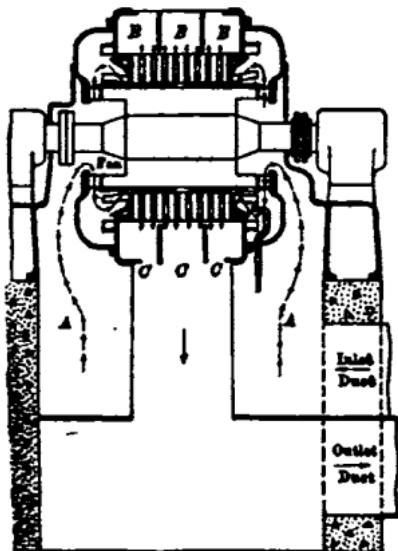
Radial system of ventilating a horizontal-shaft high-speed generator.
